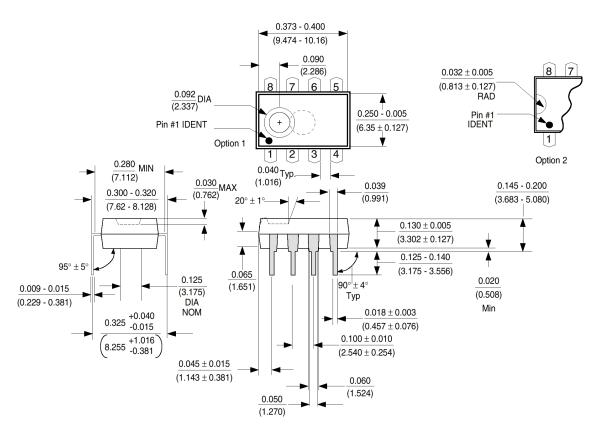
Molded Dual-in-line Package (N) Package Number N08E
